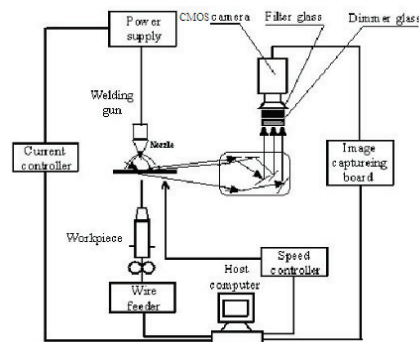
Schematic diagram of visual sensing of the weld pool
